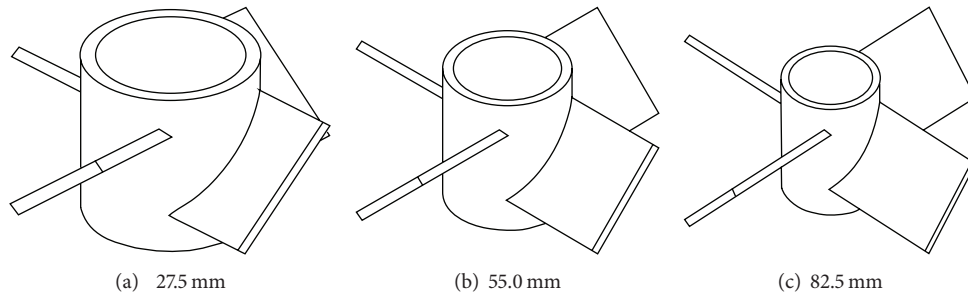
Details of Flat-blade impeller. All dimensions are in “mm.”
